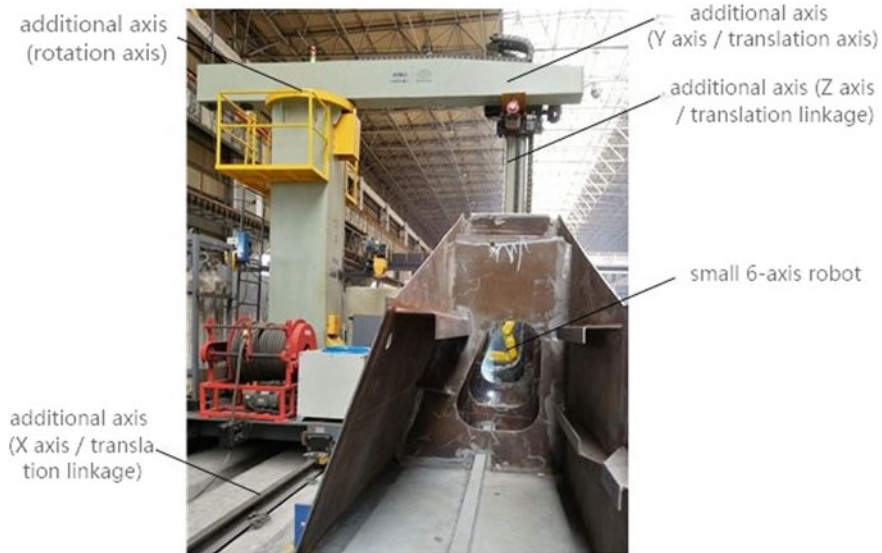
Cantilever welding robot used for ultra-narrow shaped box
